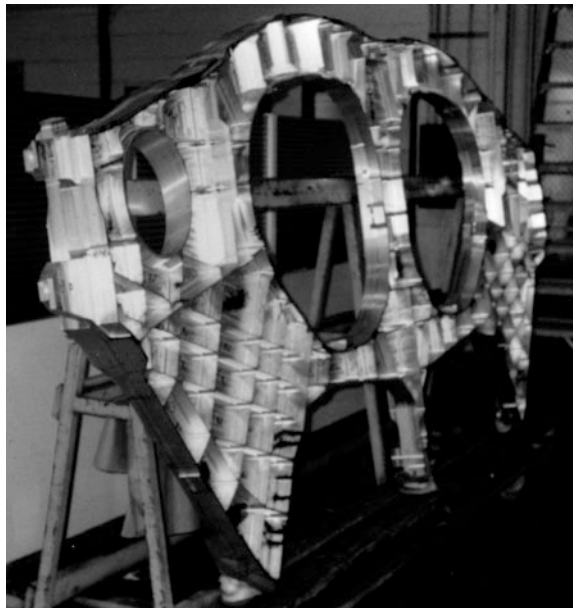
Machined bulkhead forging for a twin engine military aircraft, [1]
